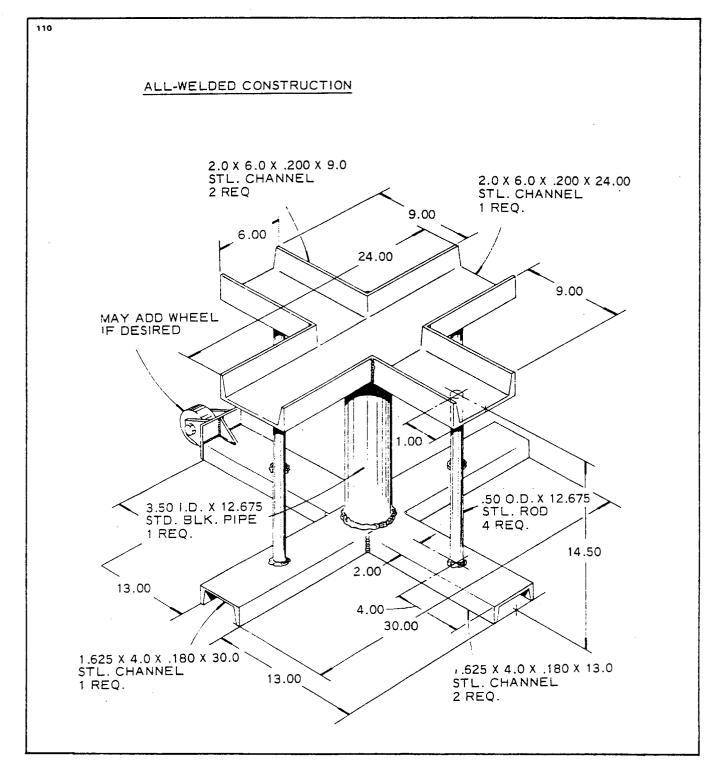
Fabricated Jack Stand for Piper Jack, Part No. 18338-00
